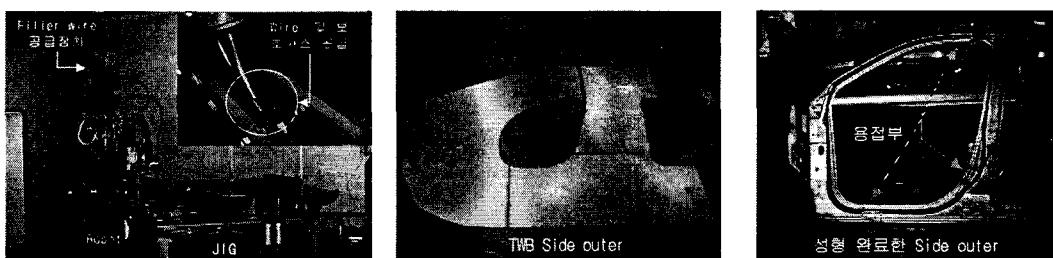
Laser welding devices, laser TWB and side outer
